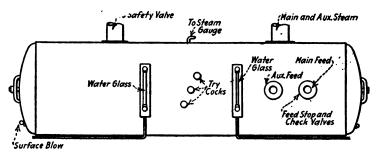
Steam Drum and Fittings B. & W. Boiler
